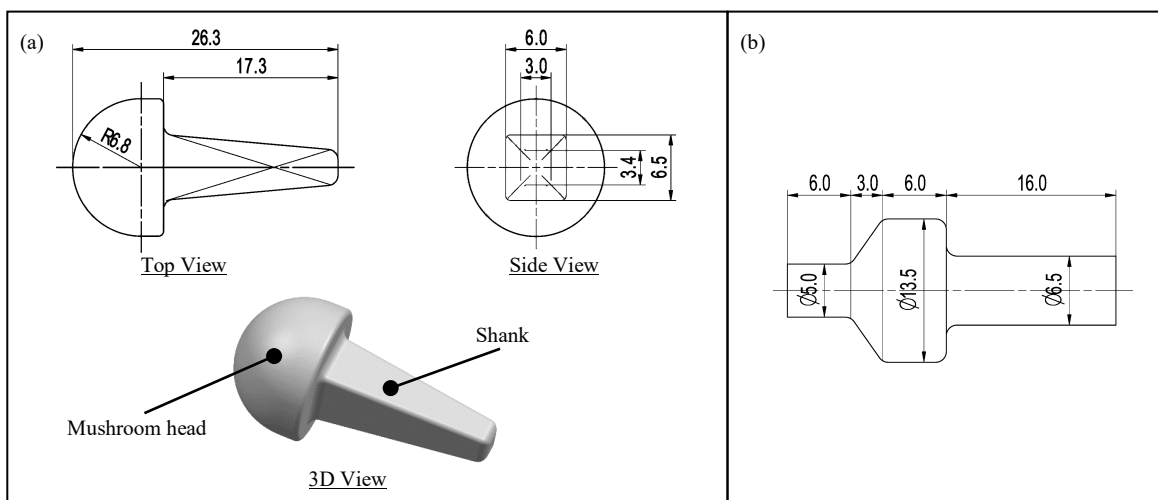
(a) Configuration of Ti-6Al-4V component and (b) design and dimensions of pre-machined cast preform (all dimensions in mm).
